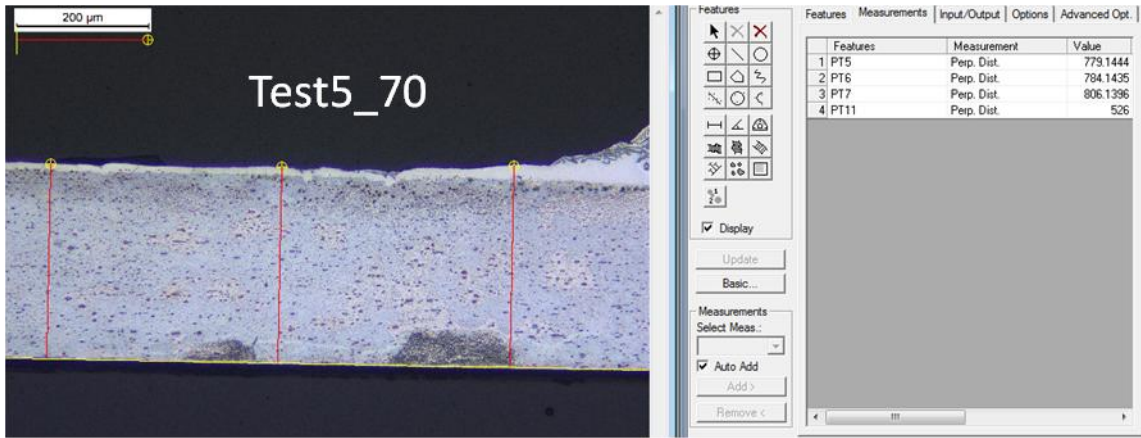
9 Measurement of the distance between the brazing sheet lower surface and the interface in a pre-brazed and brazed samples near a joint
